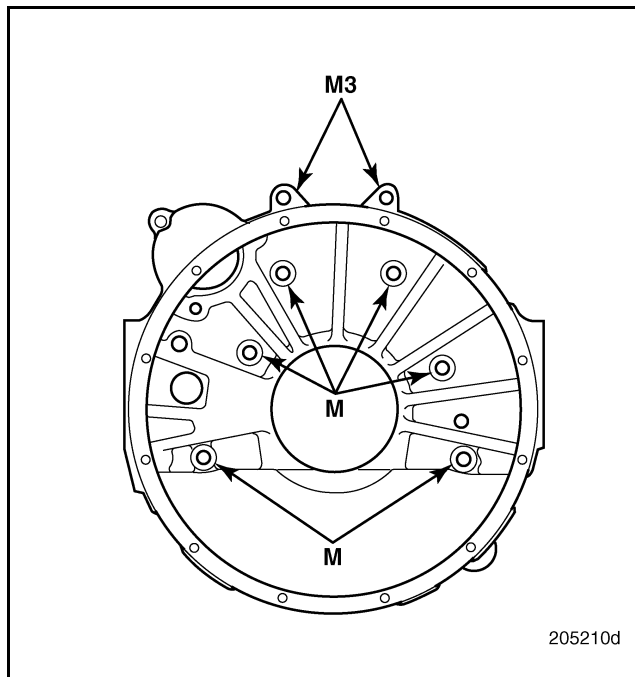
Ductile Iron Flywheel Housing with Internal Structure Ribs (Current Production)
